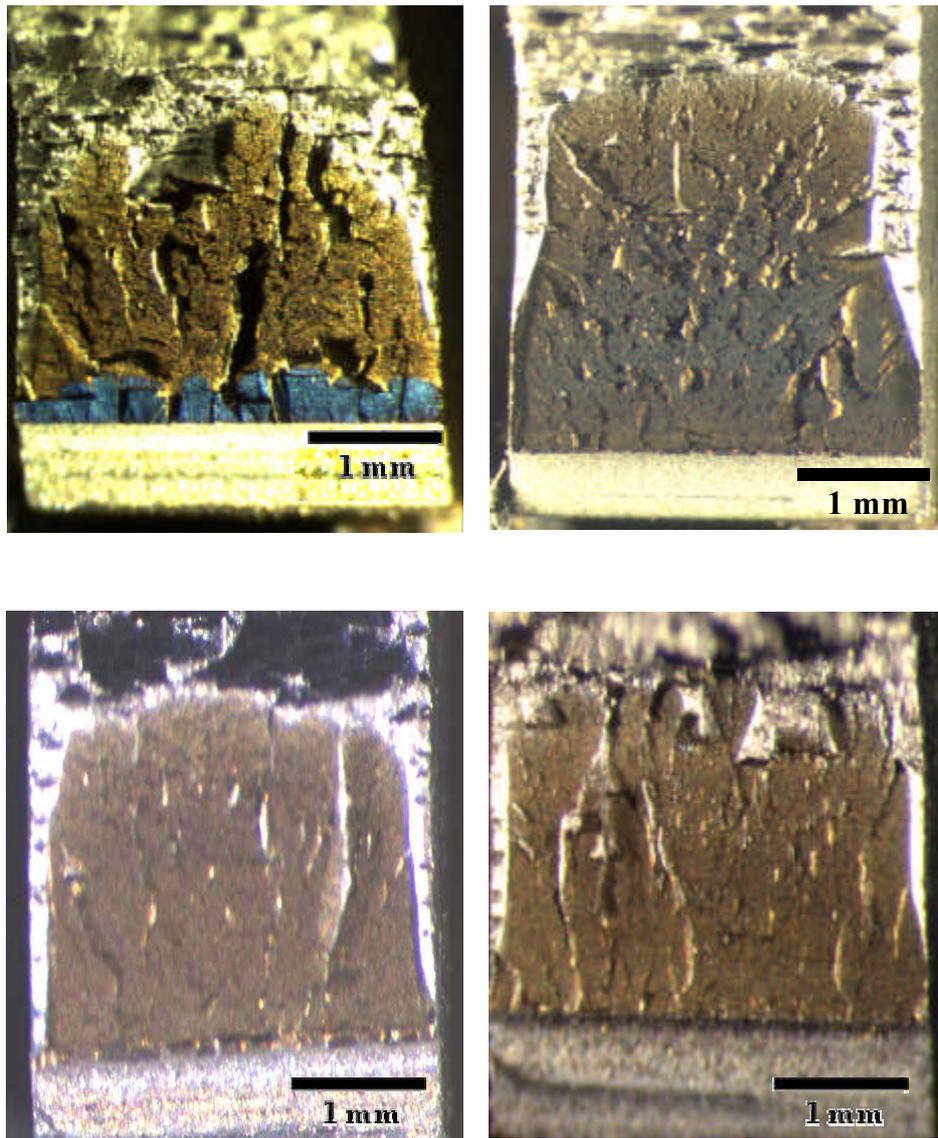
Fracture pattern of the DHC cracks for the furnace-cooled cantilever beam specimens with different types of cracks: (a) fatigue crack, (b), (c), (d) the notch tip radius of 0.1, 0.125 and 0.15 mm.
